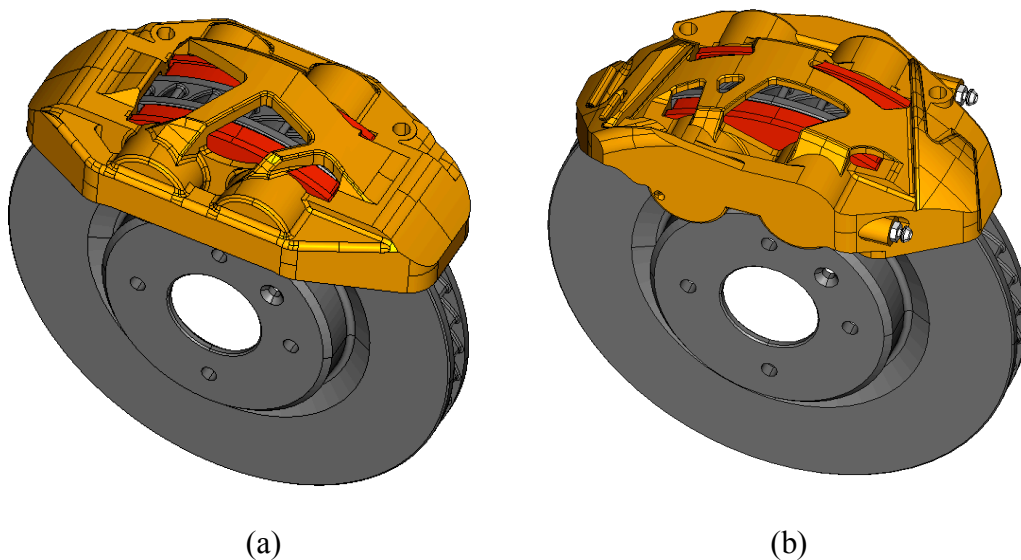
"Z Caliper" (a) and "W caliper" (b) assembly.
